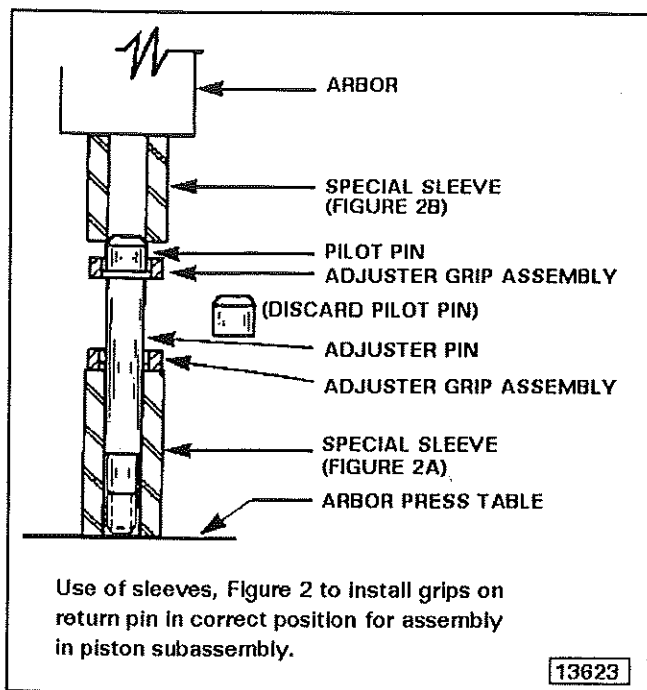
INSTALLING ADJUSTER GRIPS ON ADJUSTER OR RETURN PIN
